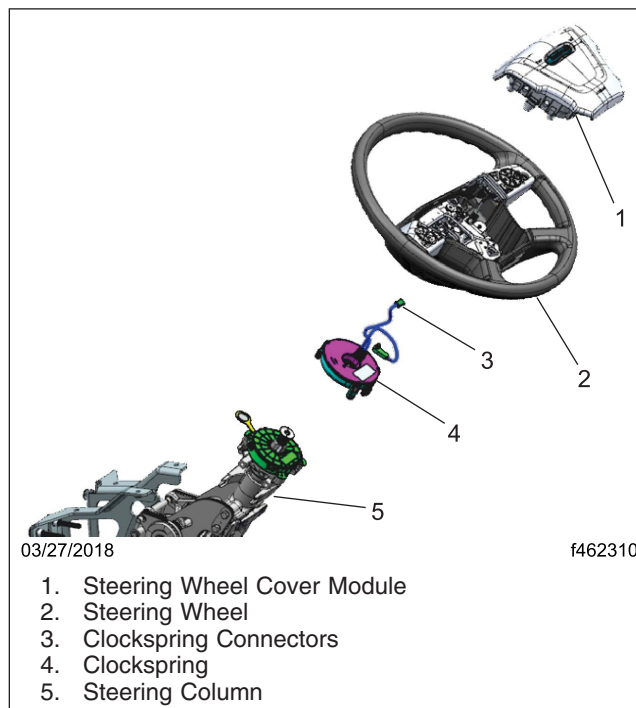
, Steering Wheel Cover Module, Steering column and Clockspring
